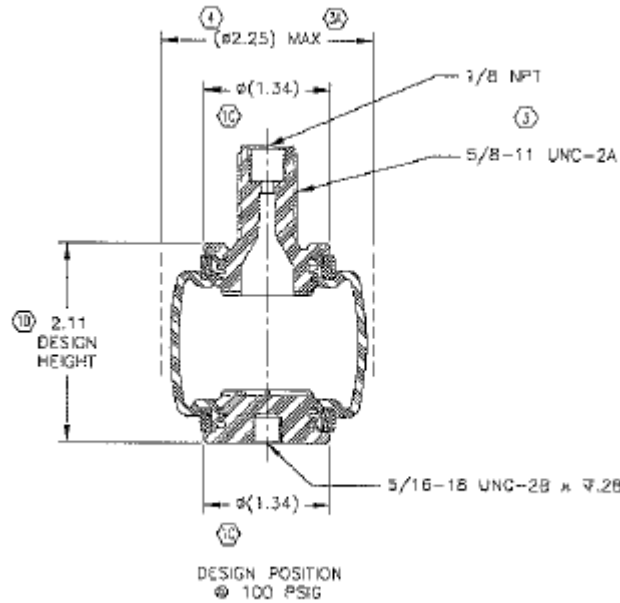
Engineering drawing of Firestone 2M2A air spring assembly
